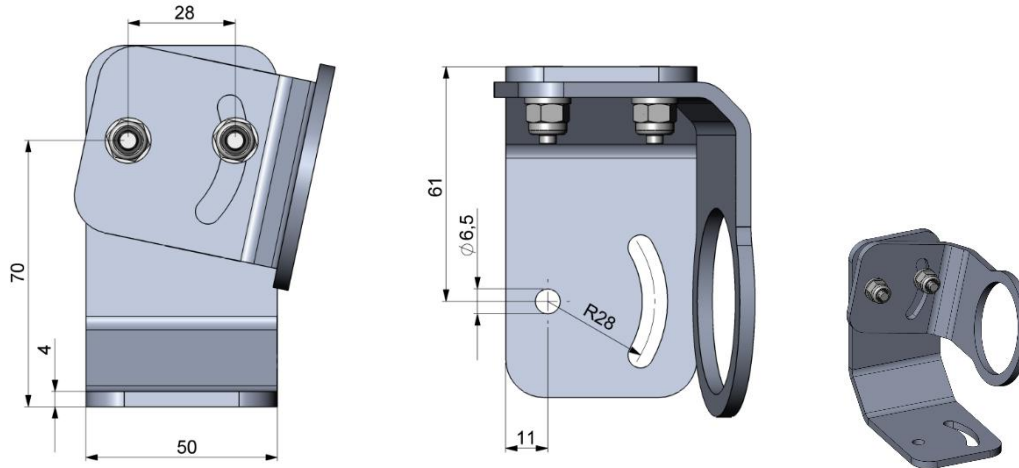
Mounting bracket, adjustable in two axes [Order No.: ACCTLAB]
